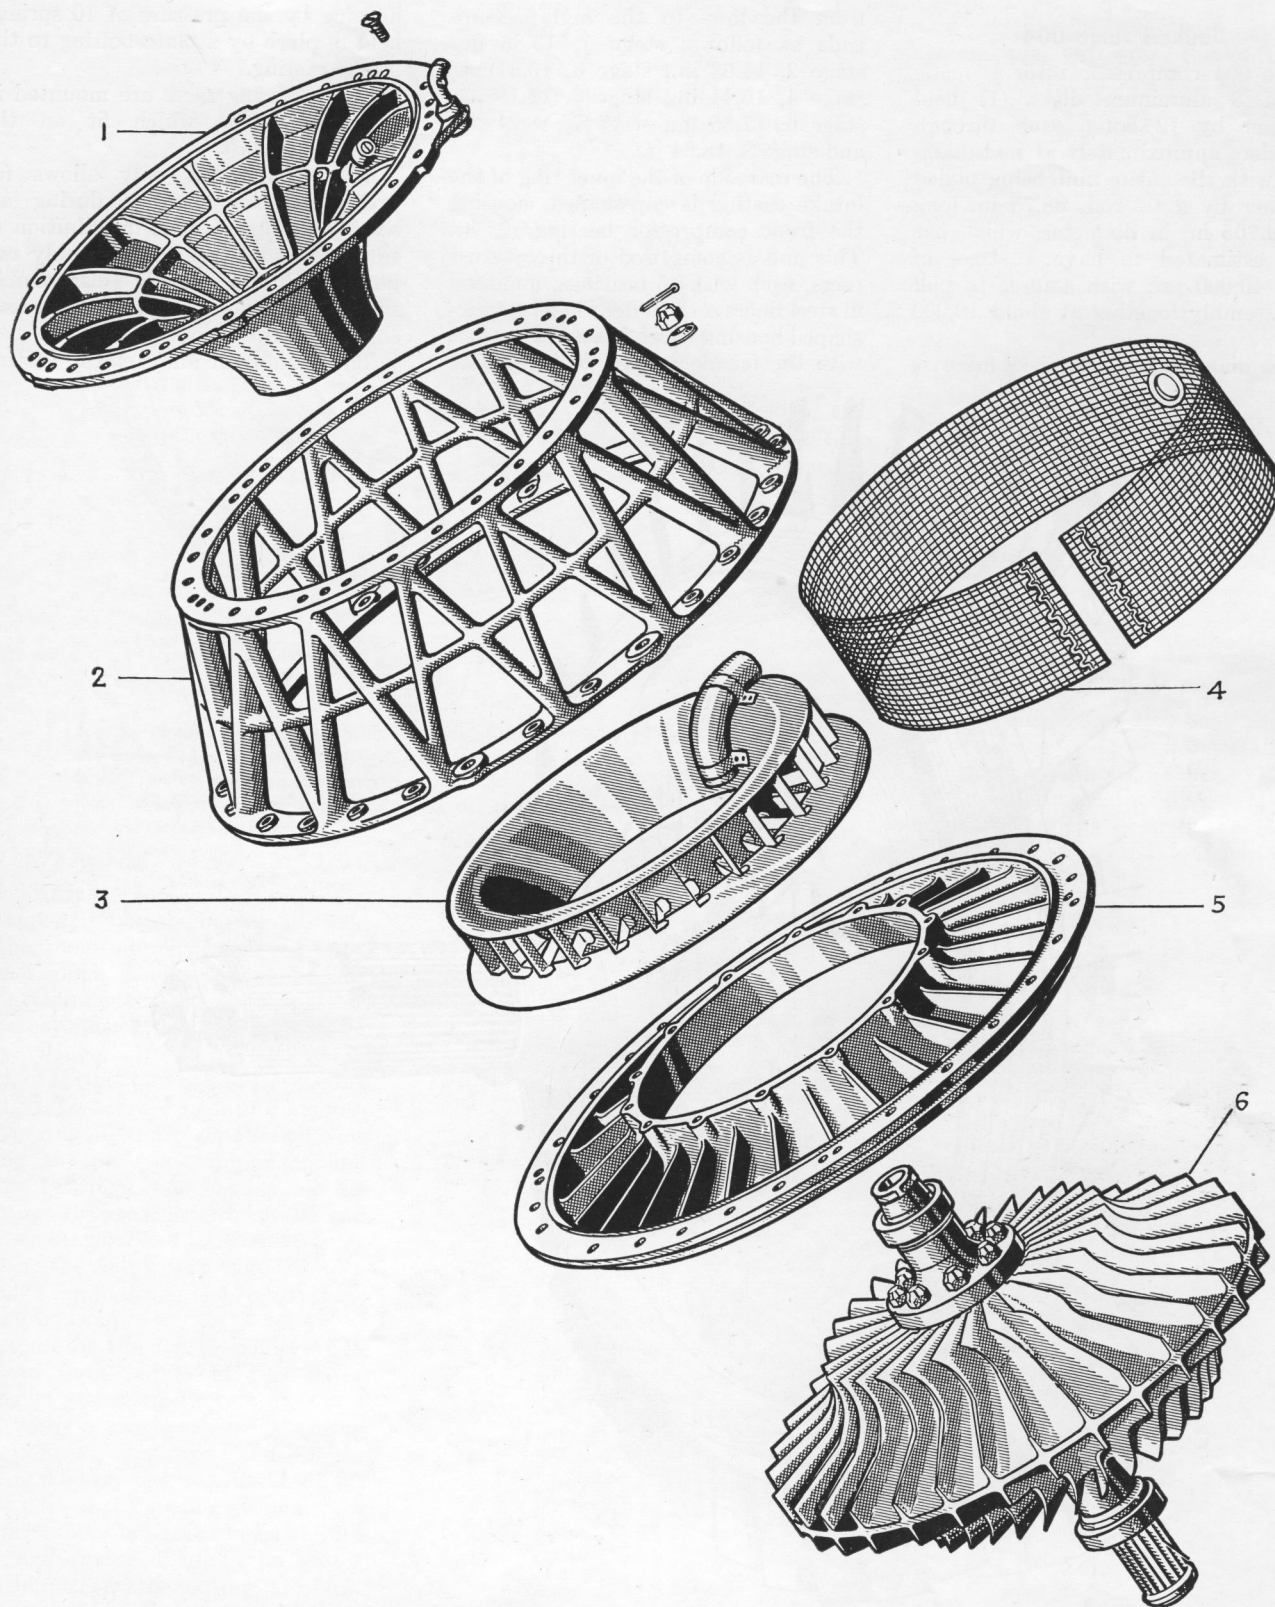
Front section of the I-40 turbojet compressor assembly: (1) front bearing and seal support; (2) front truss ring; (3) front guide blades; (4) front screen; (5) compressor casing; (6) impeller.
